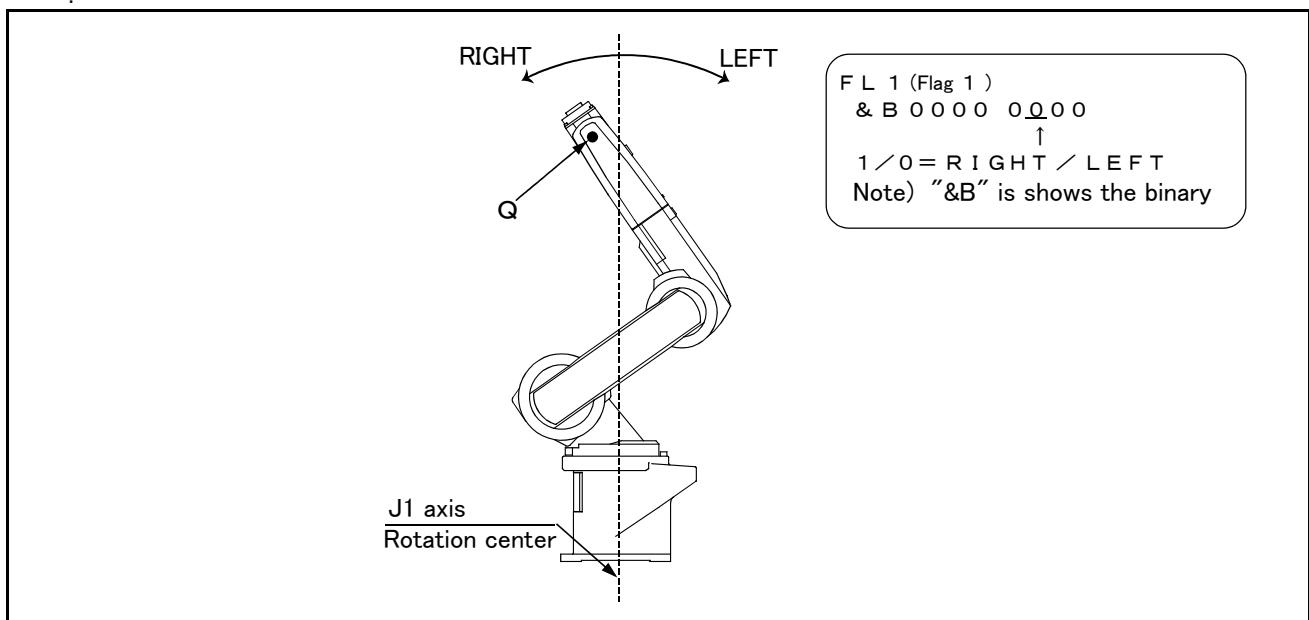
Configuration flag (RIGHT/LEFT)
